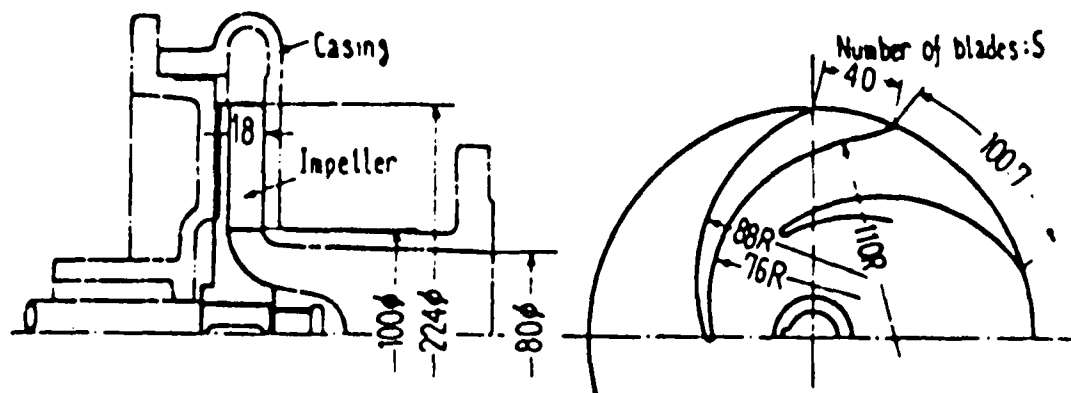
(b). SHAPE AND DIMENSIONS OF FIVE-BLADE IMPELLER USED BY MURAKAMI AND MINEMURA [30]
